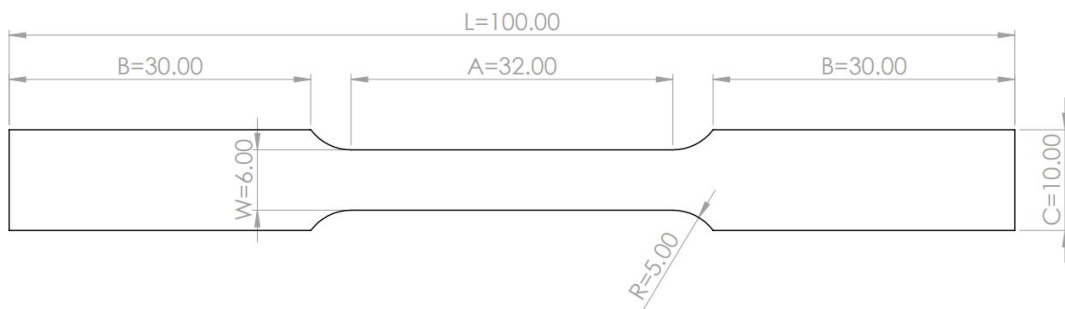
All dimensions are given in mm. The top surface of the tensile specimen is shown with its relevant dimensions.
